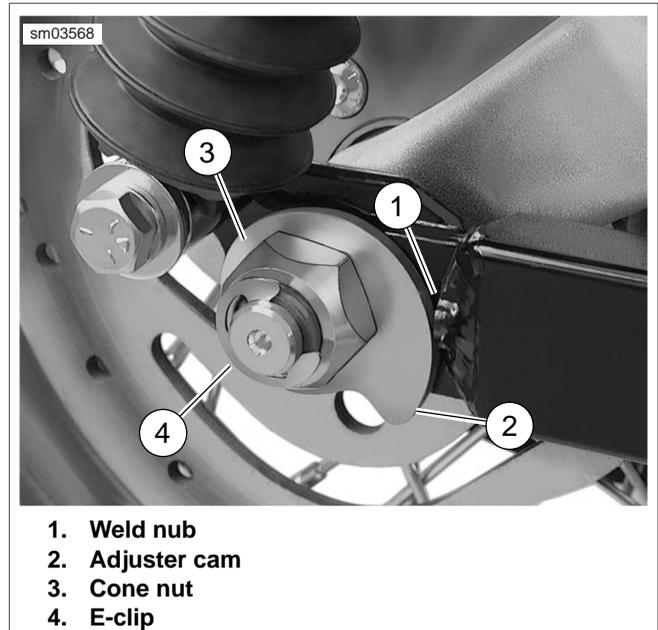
Rear Wheel and Adjuster Cam (Right Side)
